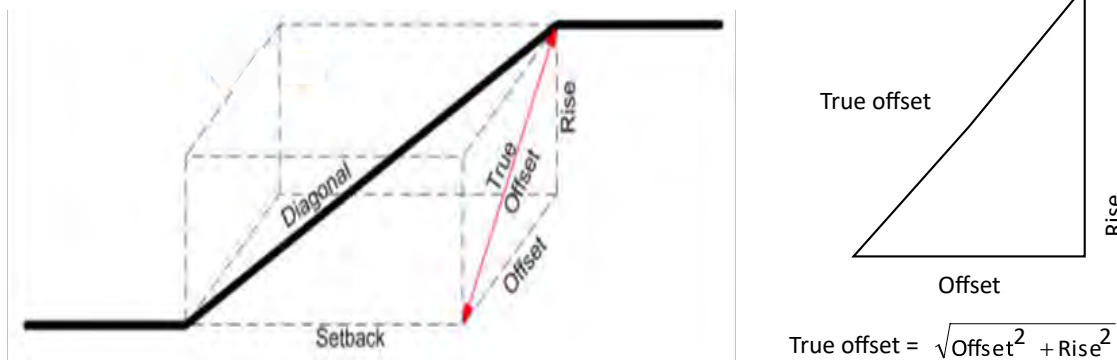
Straight length pipe requirement for pipe having rolling offset in vertical and horizontal plan
